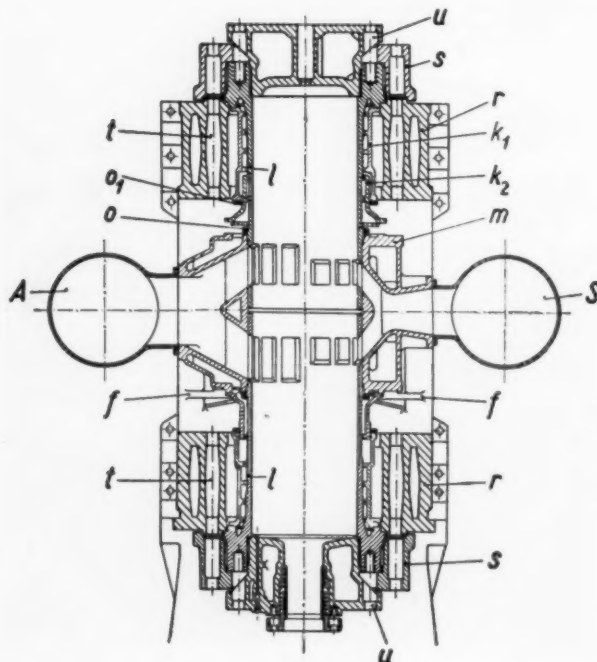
CYLINDER, A.E.G.-HESSELMAN DIESEL ENGINE
